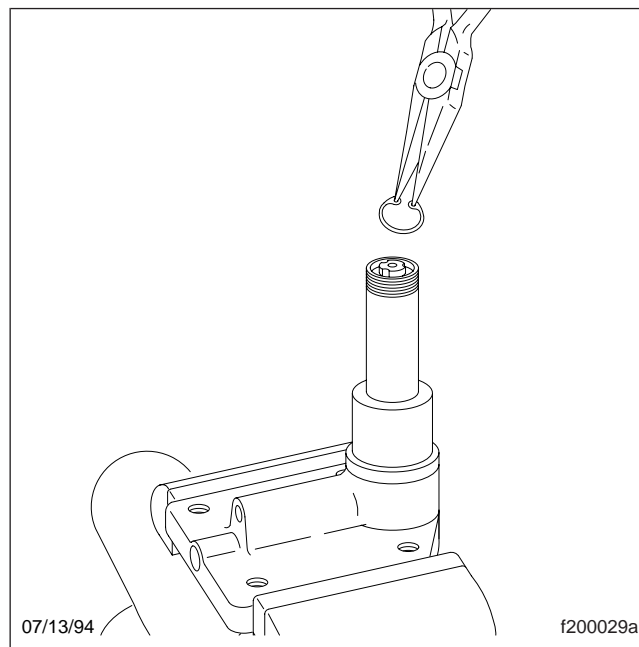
, Retaining Ring Removal and Installation (sheave not shown)
